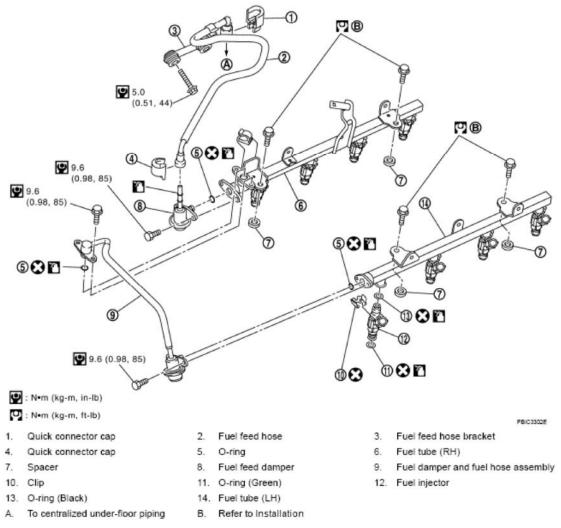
Identifying Fuel Injector And Fuel Tube Components With Torque Specifications
